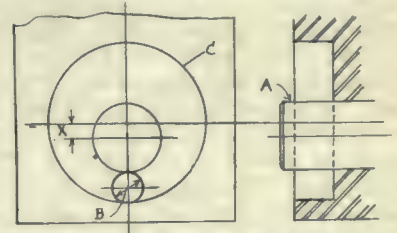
MEASURING AN ECCENTRIC HOLE WITH PLUG.
